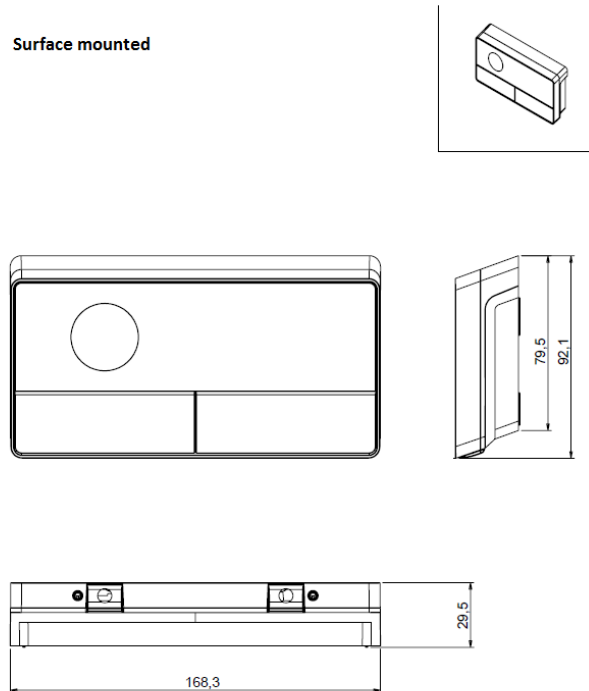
W1600 surface mount assembled unit - Dimensions: mm
